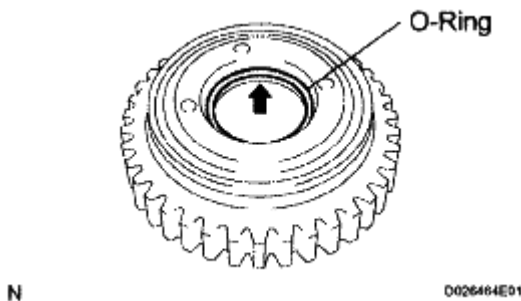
Locating Overdrive Direct Clutch O-Ring
